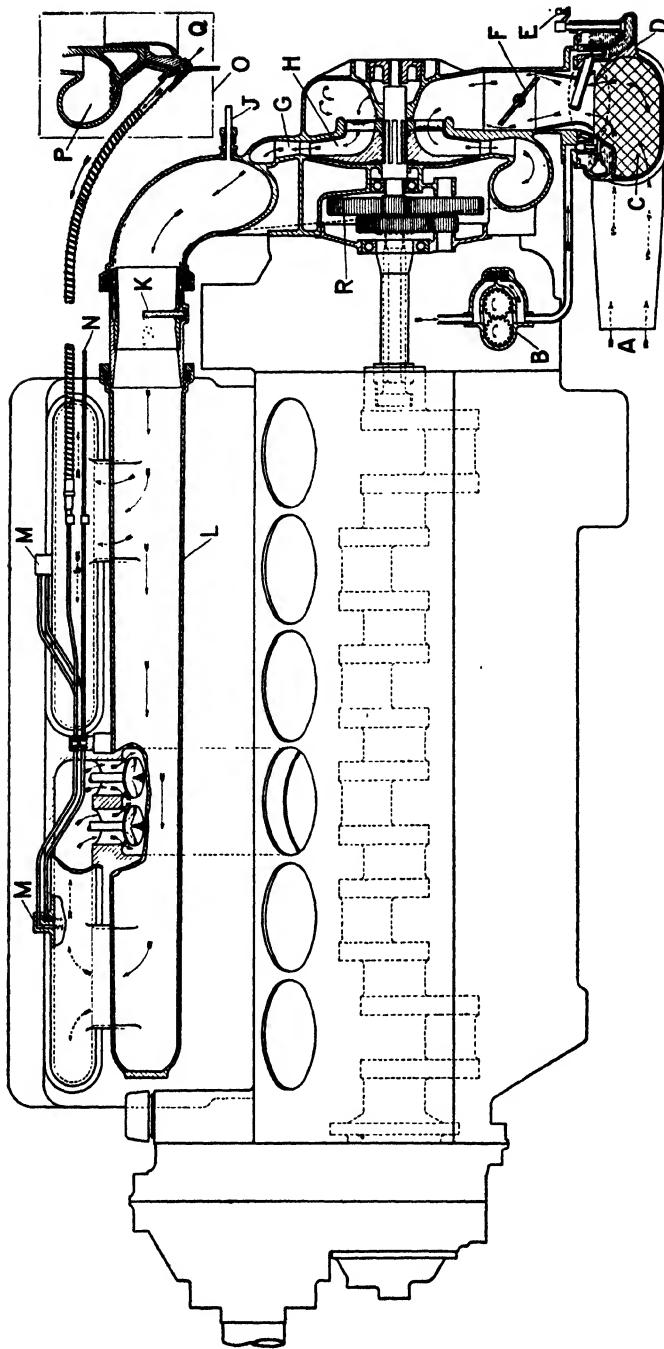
Diagrammatic Lay-out of Supercharger System (One Cylinder Block and Connecting Rods Removed).
